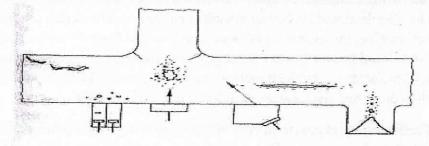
Typical casting defects and their detection methods by UT
